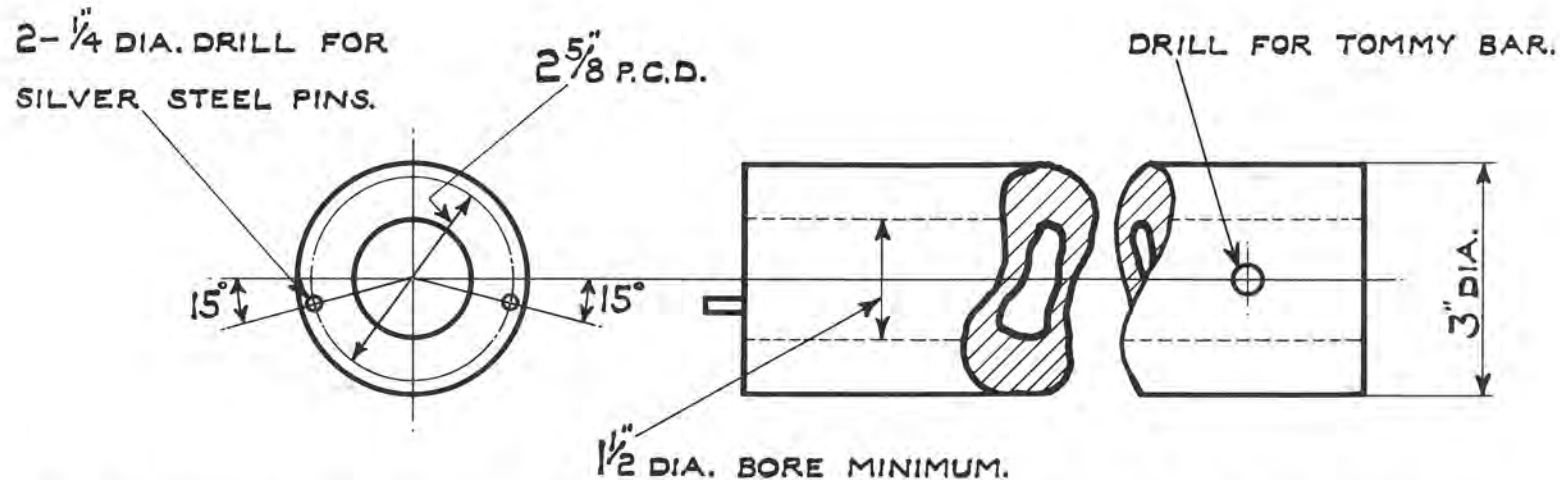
SPECIAL SPANNER FOR CUTTER SPINDLE LOCKNUT ON L. H. 3. MACHINE.
